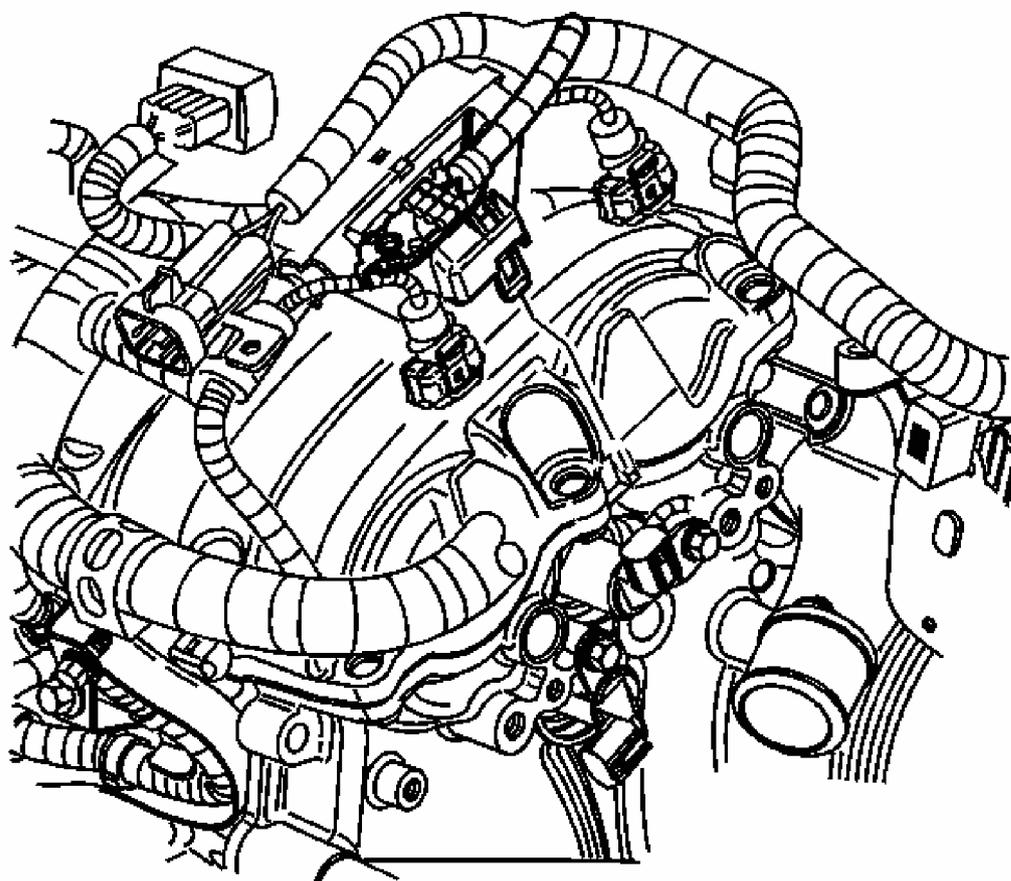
View Of Right Ignition Coils Electrical Connectors
